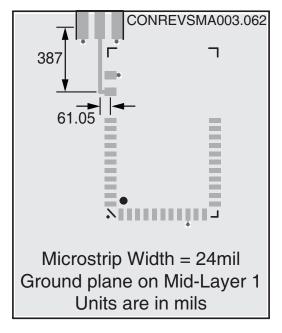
HUM-A-900-CAS with an Edge Mount RP-SMA Connector PCB Layout
